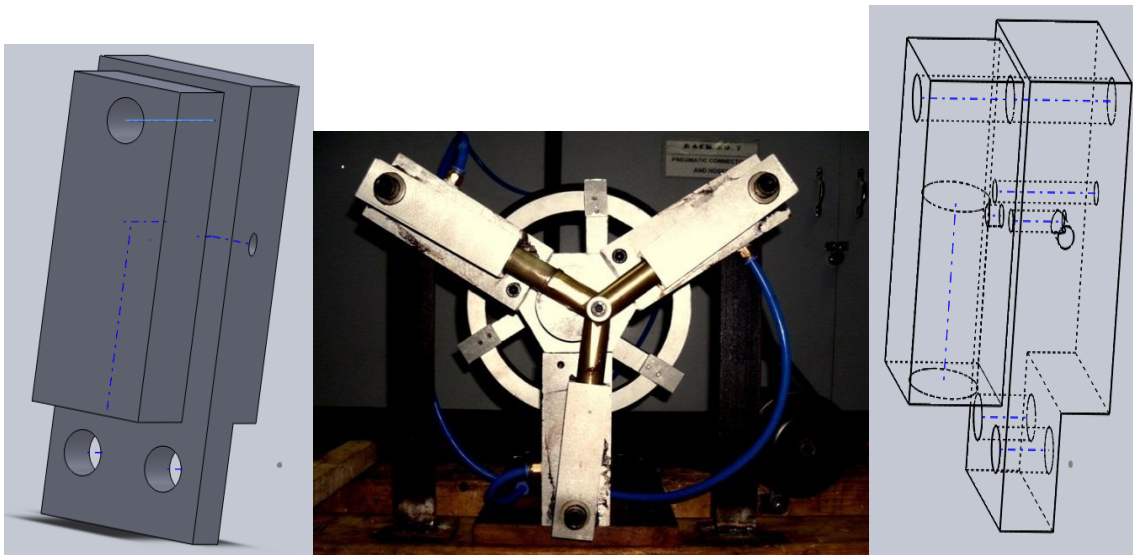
Design of engine parts in solidworks software and the pneumatic engine which is fabricated.
